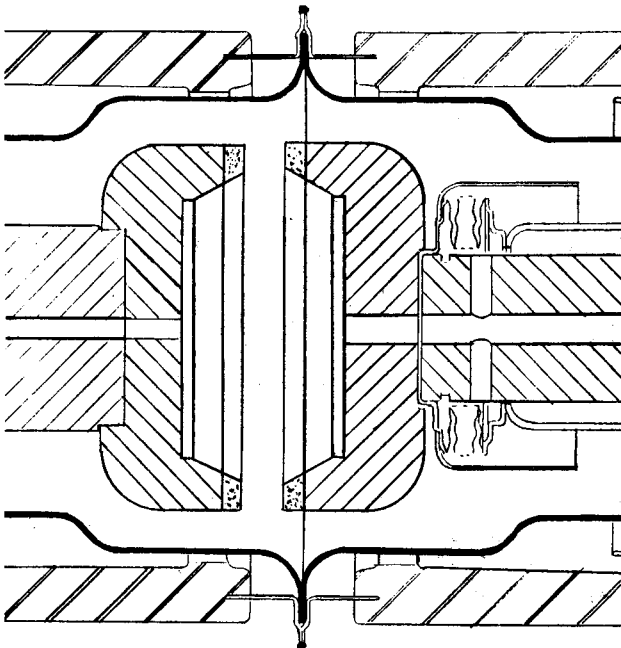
'Old' style 'V5' contact and shield geometry. Arc movement outwards caused damage to centre shield.
